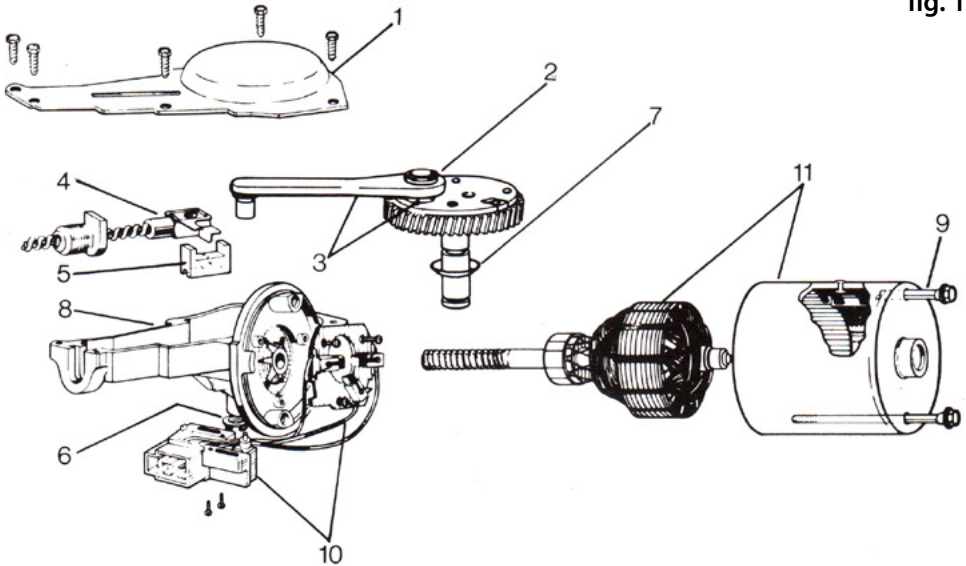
Exploded view of windscreen wiper motor (Sec 22 and 23)
